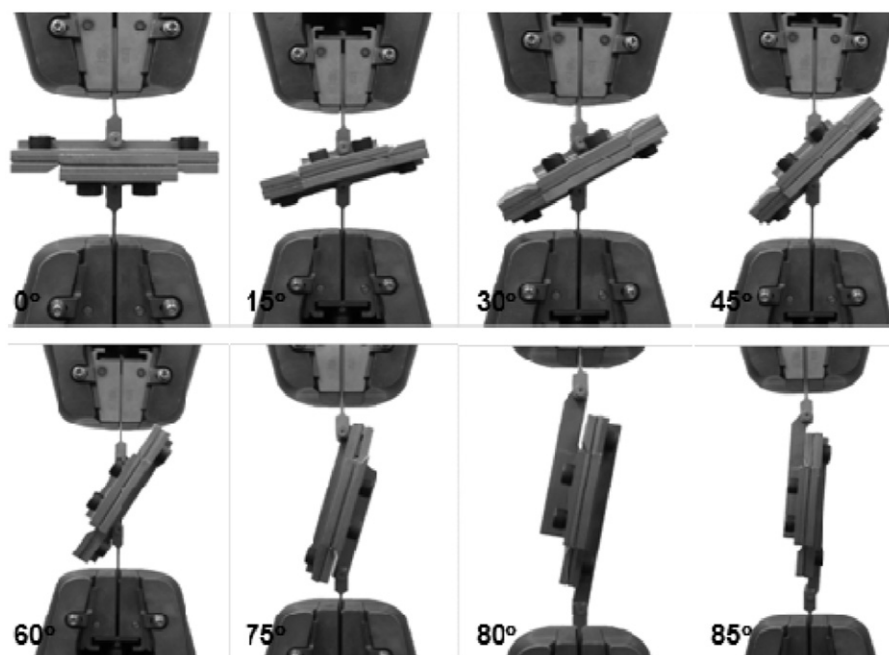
Fixture set for failure tests of laser welded specimen under combined loading conditions.
